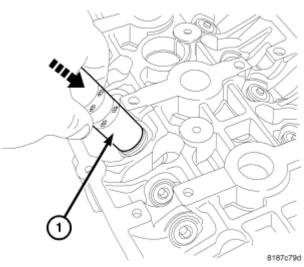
Valve Keeper Tool Courtesy of CHRYSLER LLC
